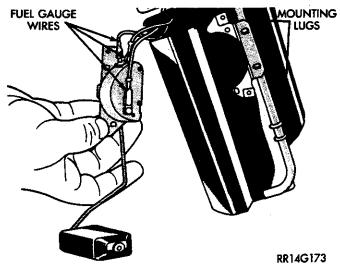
Fuel Gauge Sending Unit Wiring Terminals
